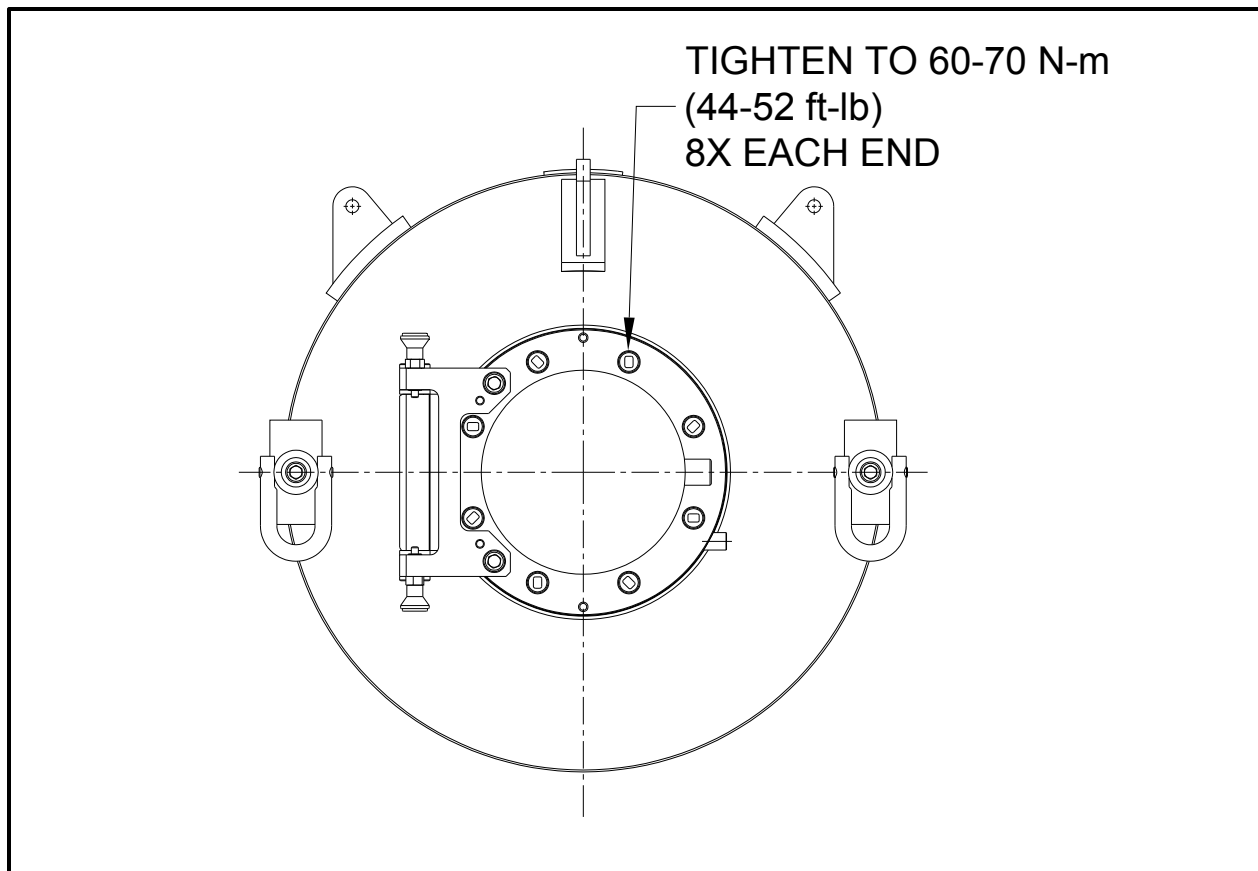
Tightening Torque of LTSS End Door Fasteners
